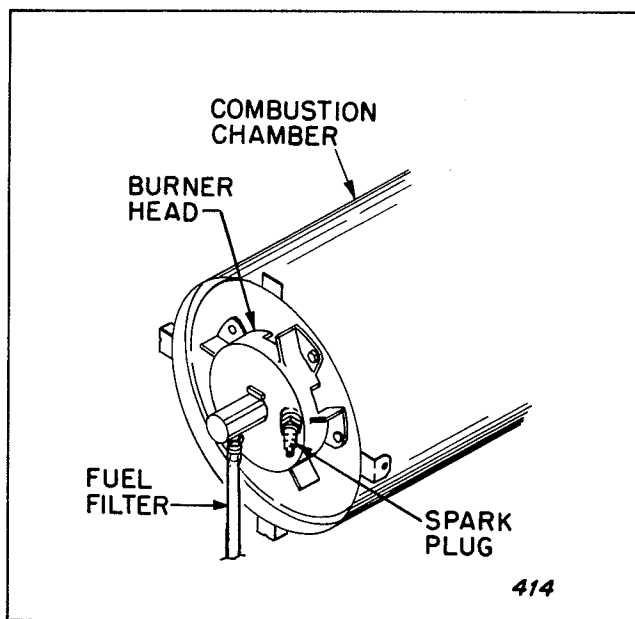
Burner Head, Spark Plug, and Fuel Filter
